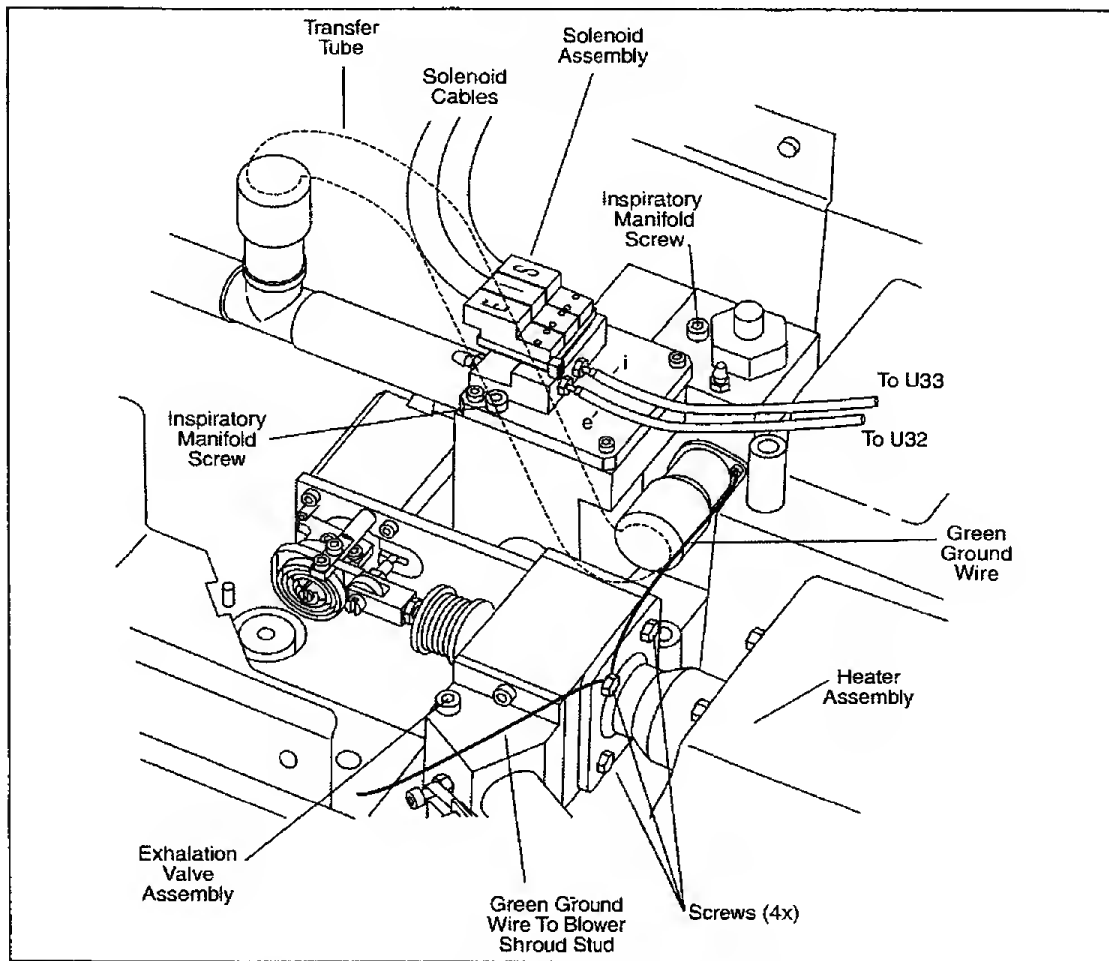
Exhalation Valve and Filter Heater Assembly
